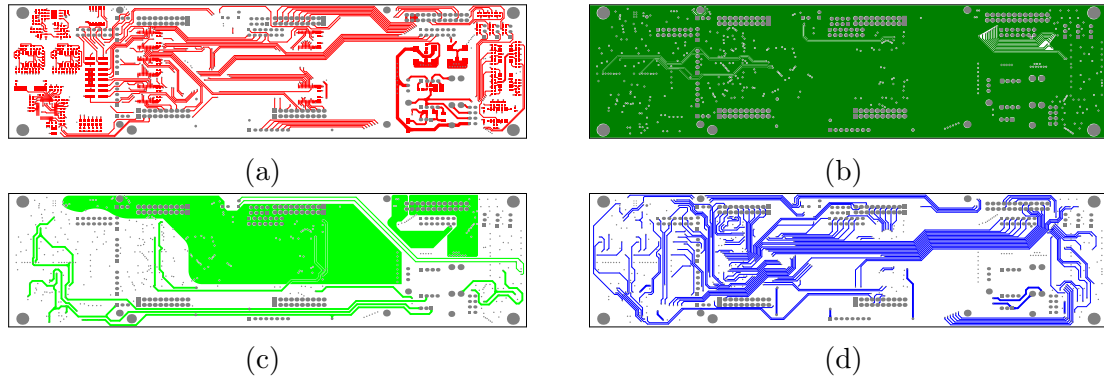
Control interface board layout. (a) Top signal layer. (b) Ground layer. (c) Power layer. (d) Bottom signal layer.
